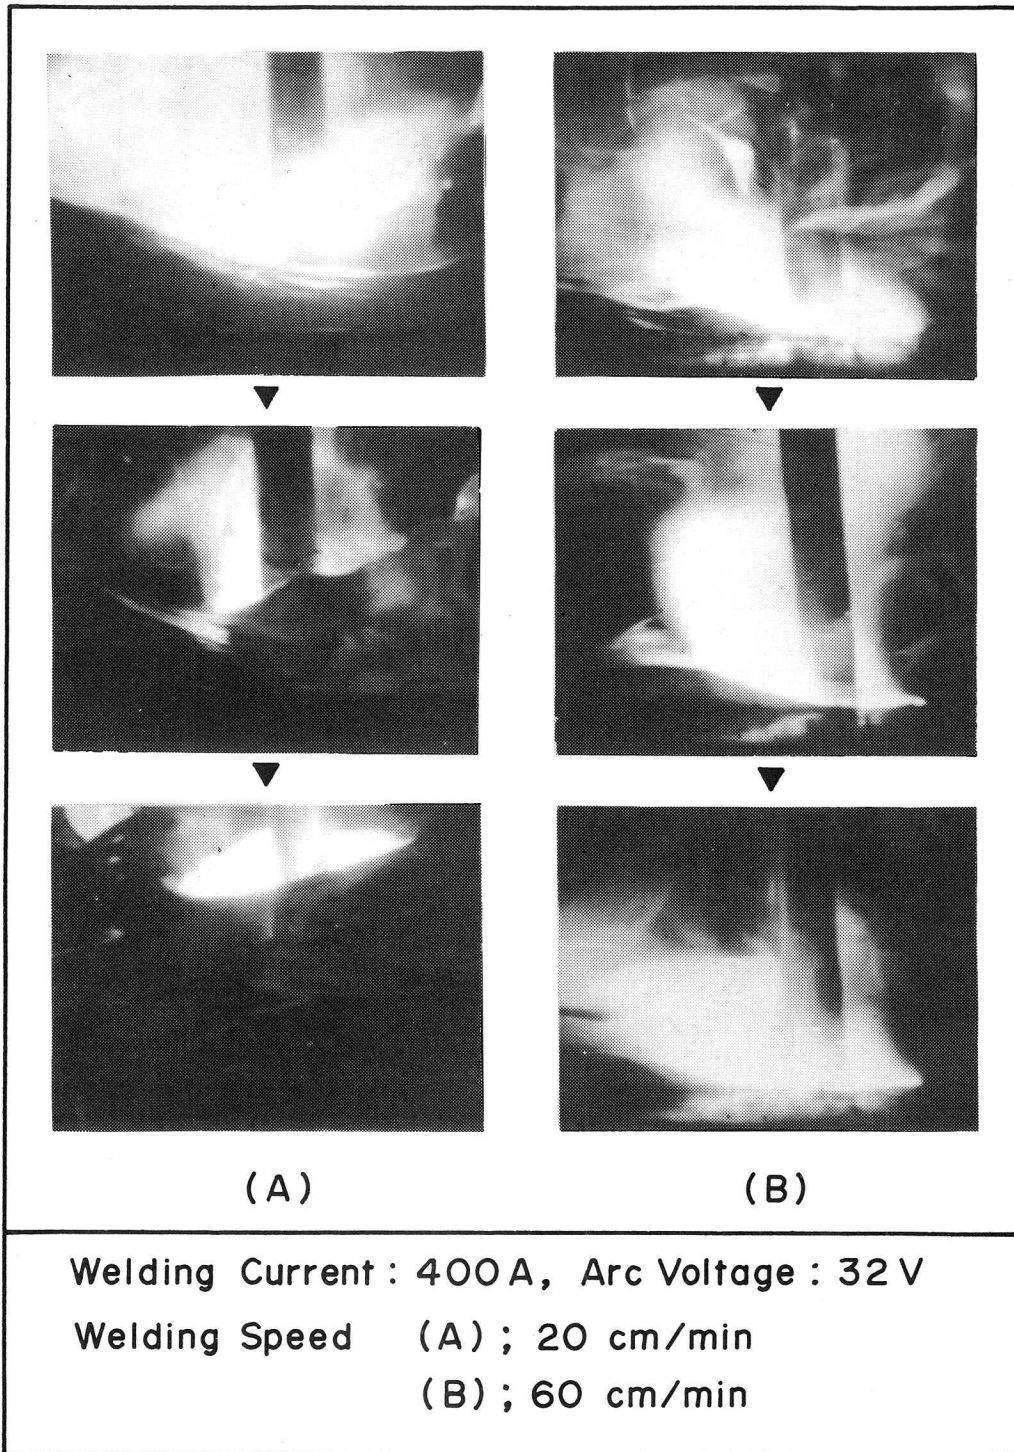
Effects of welding speed on the behavior of arc and molten pool.
